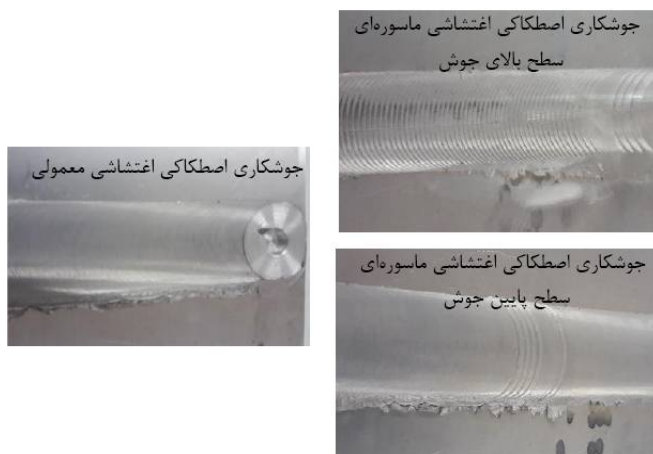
The samples weld by the typical and bobbin tools
